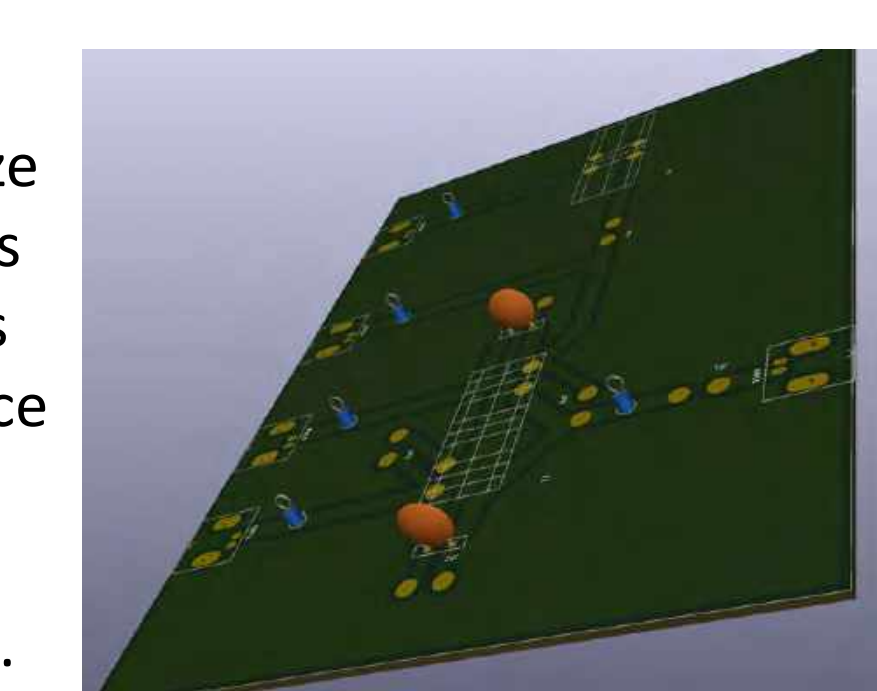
3D rendering of PCB implementing a test board (Oblique view)
